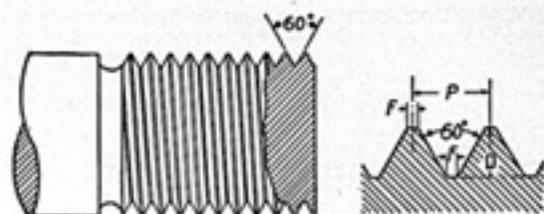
American National Screw Thread Form (Formerly U. S. Standard Screw Thread).
